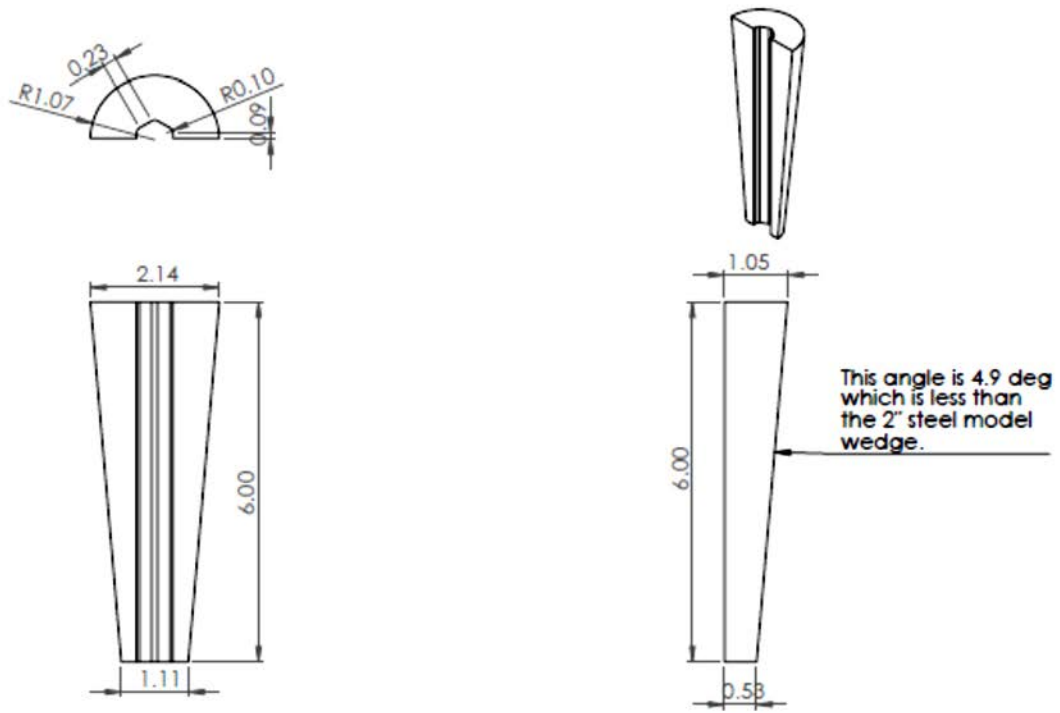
Prototype of Longer 8-in, 2-Piece 3D Printed Wedges for CFCC. CFCC = carbon fiber composite cable.
